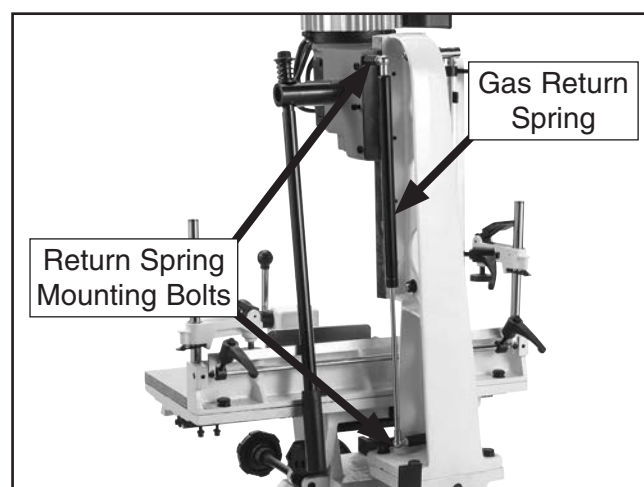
Gas spring mounting bolt and lock nut (top end shown).
